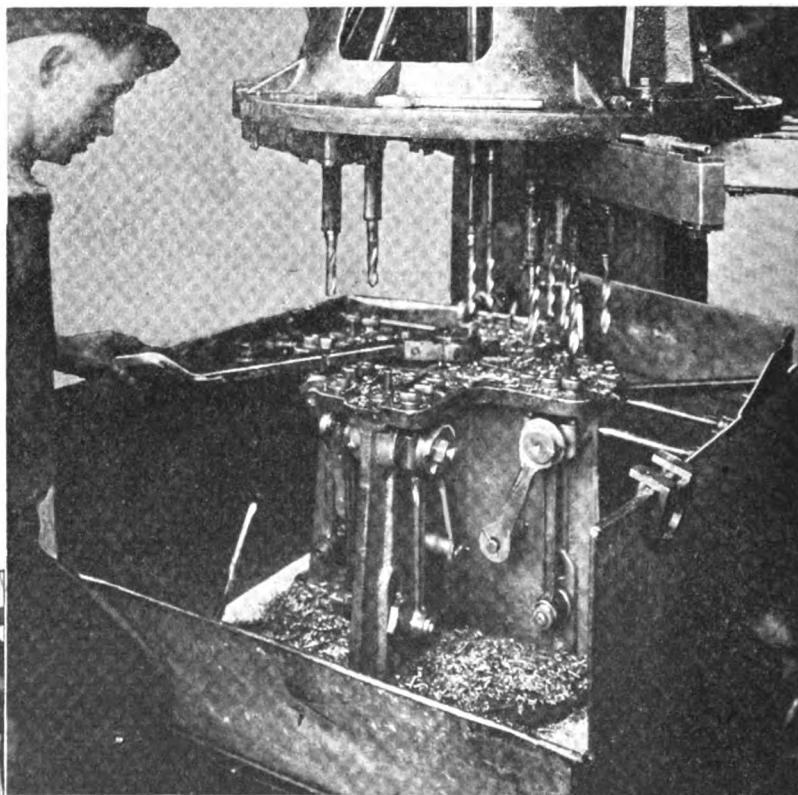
Fixture for drilling holes for connecting-rod bolts in crankshaft end of connecting-rods. This fixture accommodates eight rods at one time. Six rods are machined at once
